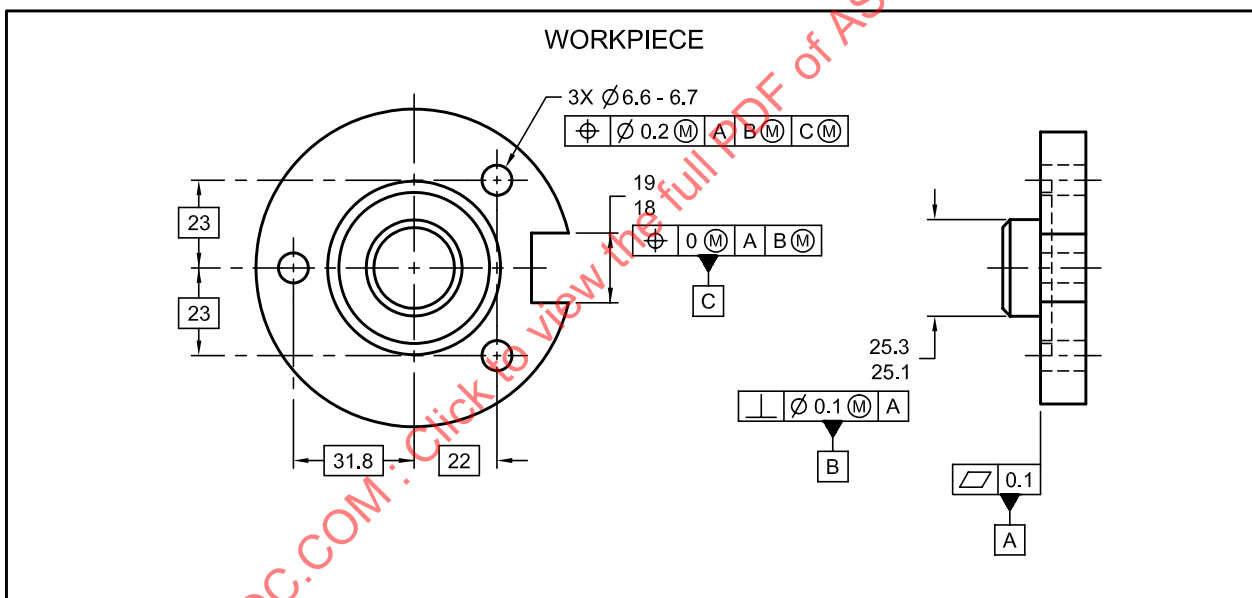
Cylindrical and Rectangular Datum Features (Cont'd)
